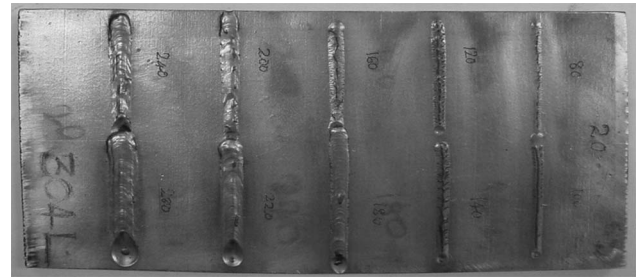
Bead-on-plate A-TIG welds on 10 mm thick 304LN stainless steel plate.
